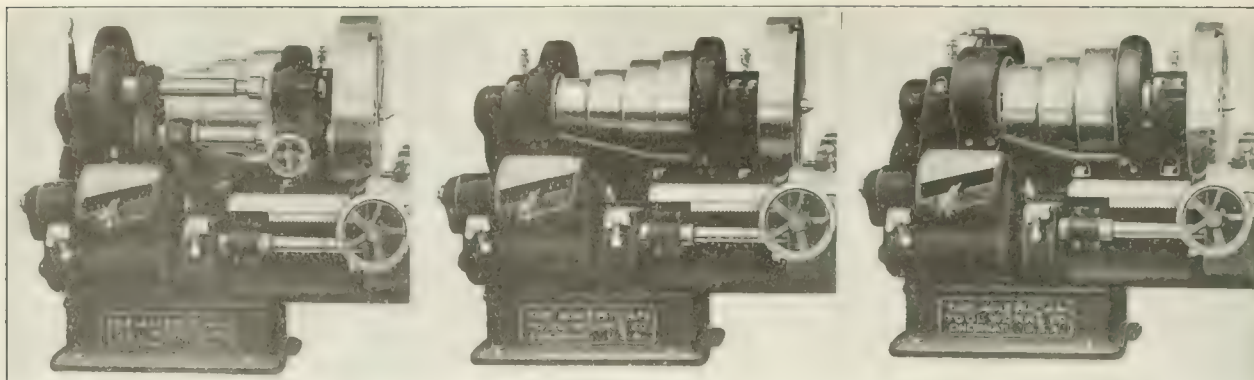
The Four Step Cone Pulley Triple Geared Head.
